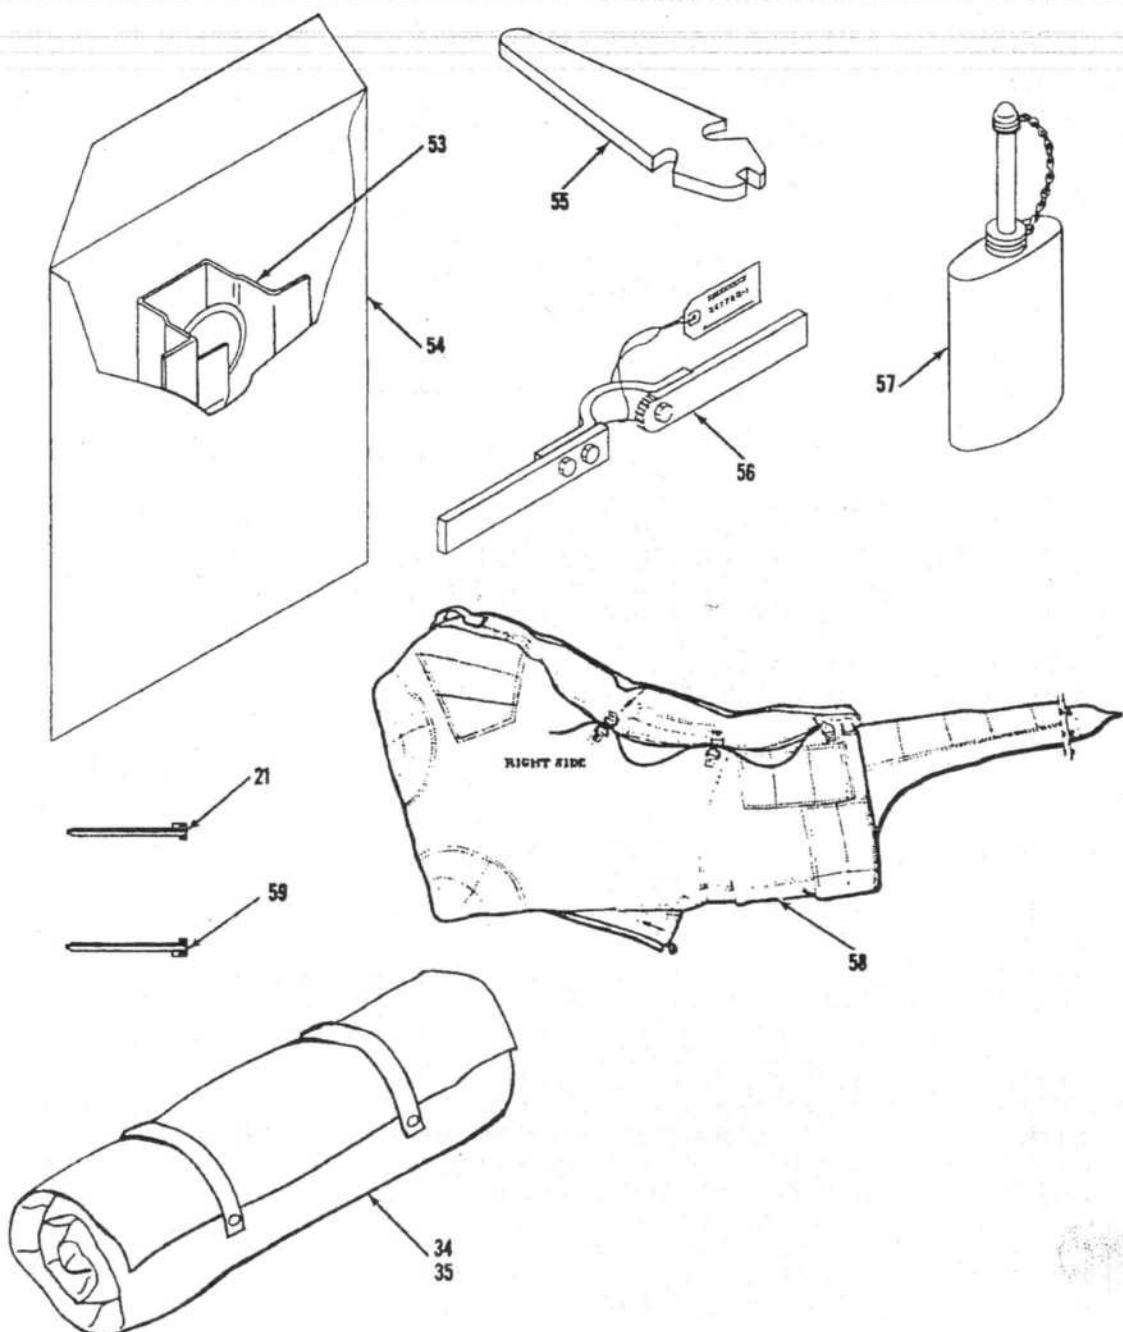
20 MM A.A. Guns and Mounts Special Tools
